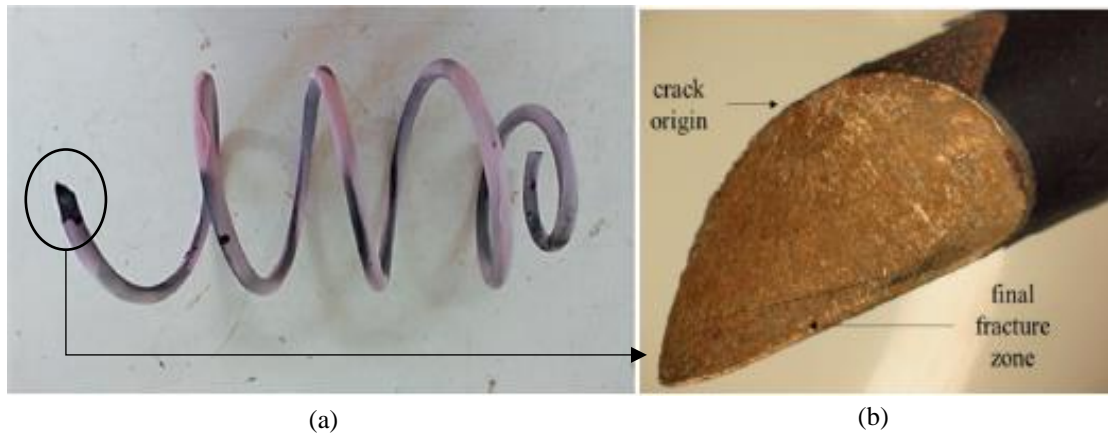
Fatigue failure of suspension coil spring: (a) fractured coil spring, (b) fracture surface
